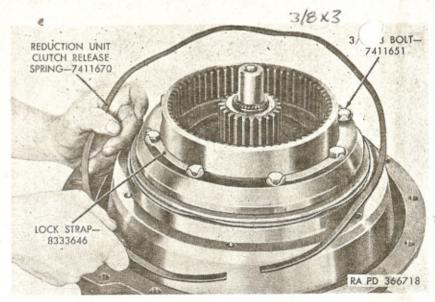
Removing or installing reduction unit clutch release spring (303M).
